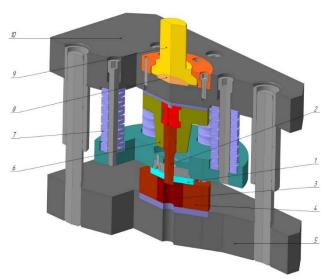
Model of an experimental stamp for punching a hole: 1 – blank; 2 – punch; 3 – matrix; 4 – matrix holder; 5 – lower plate; 6 – punch holder; 7 – disc spring; 8 – support; 9 – shank; 10 – upper plate
